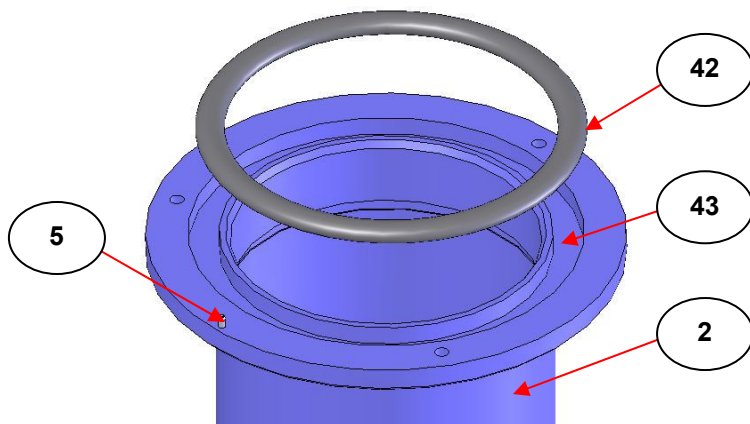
Vacuum Jacket Assembly Silicone O-ring for Sealing
